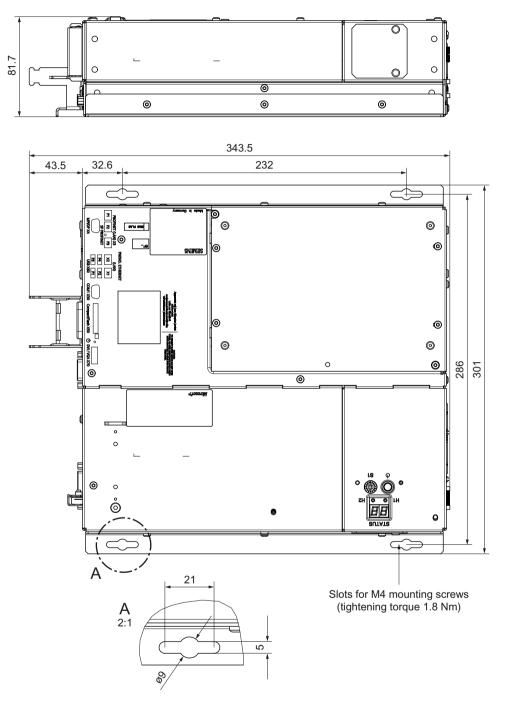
Dimension drawing, PCU 50.5 mounted flat
